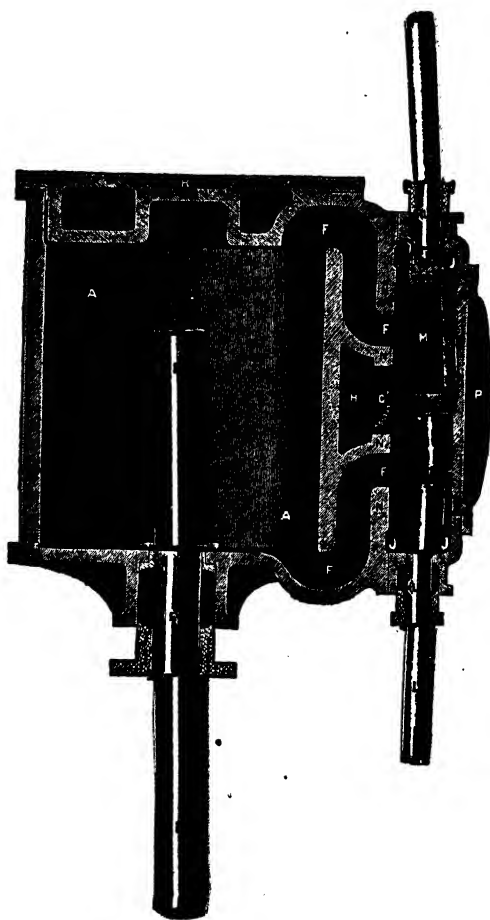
Sketch of section of cylinder, with movable piston and slide valve.
